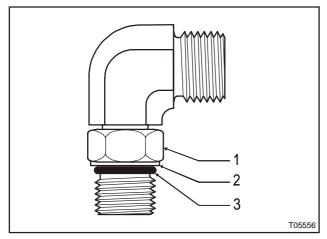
Elbow fitting with adjustable straight thread O-ring end
